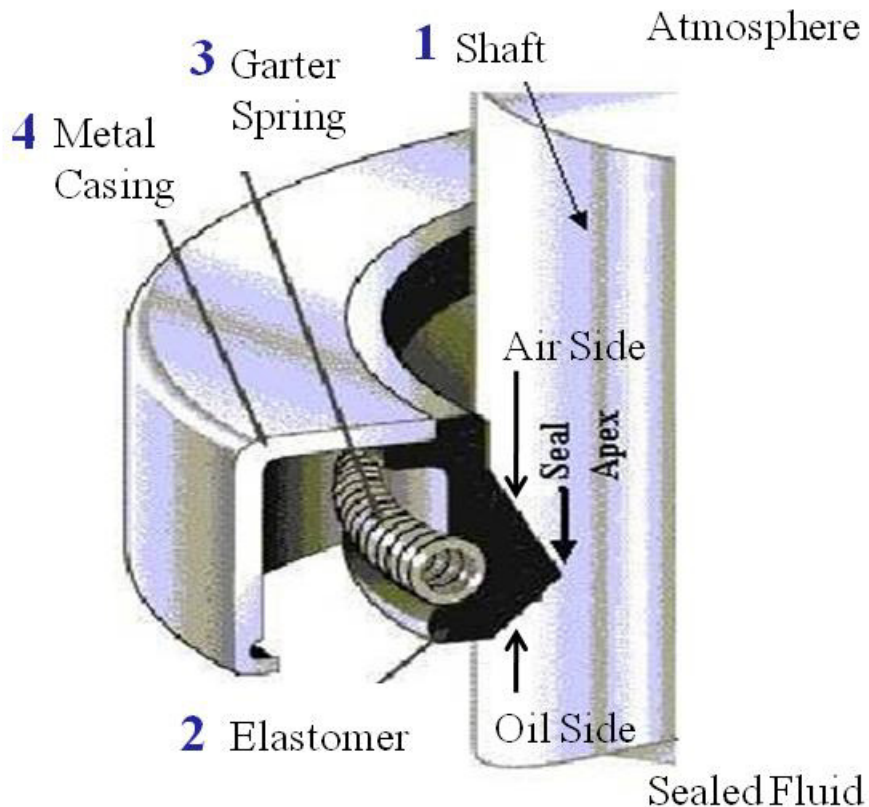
Cross Sectional View of Lip Seal (Chicago Rawhide, [1])
